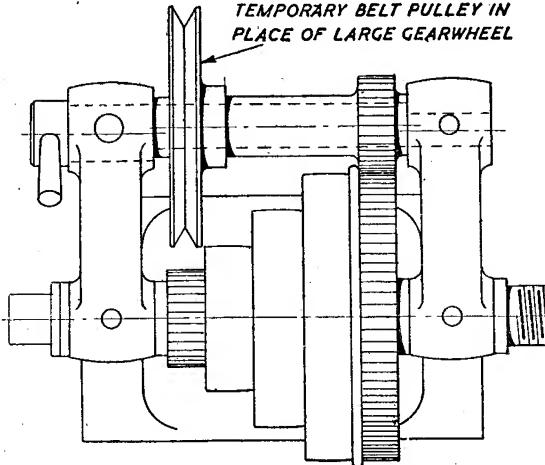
Back gear of lathe, modified to provide a quick-change slow-speed gear from an auxiliary motor or countershaft.
